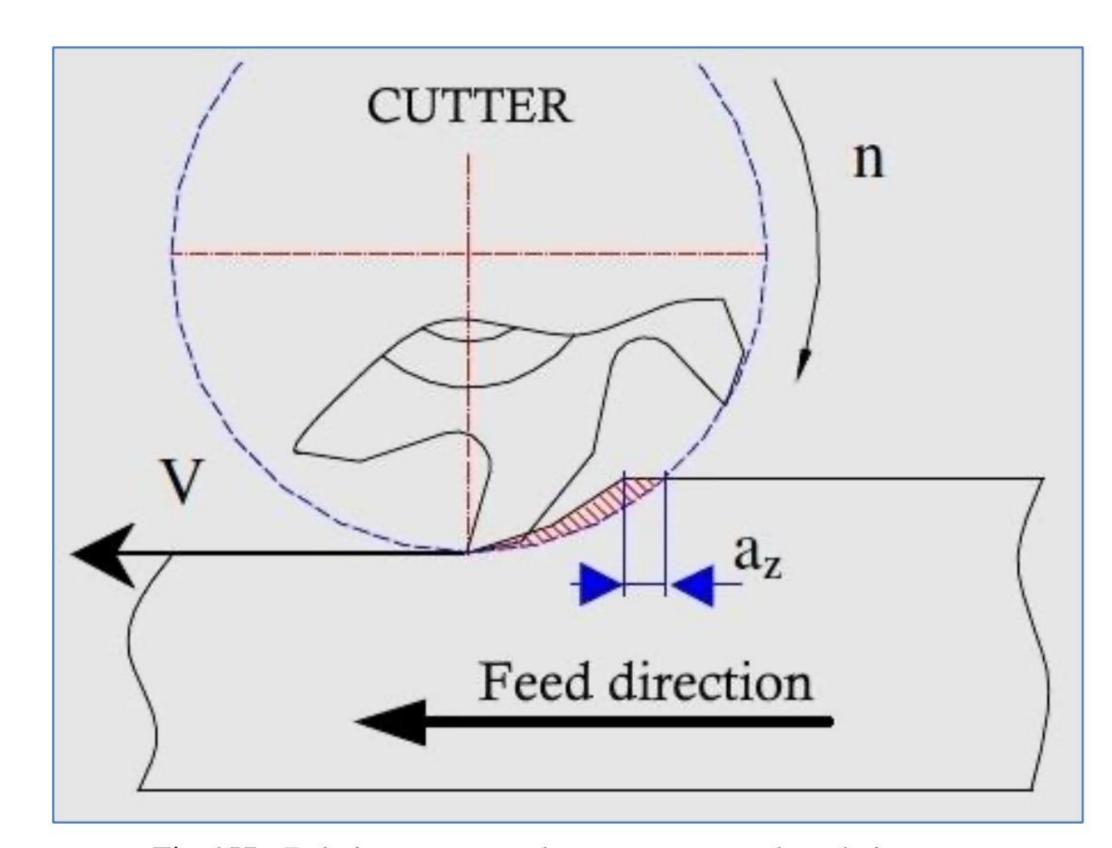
Relative movement between cutter and workpiece with concordant feed direction
